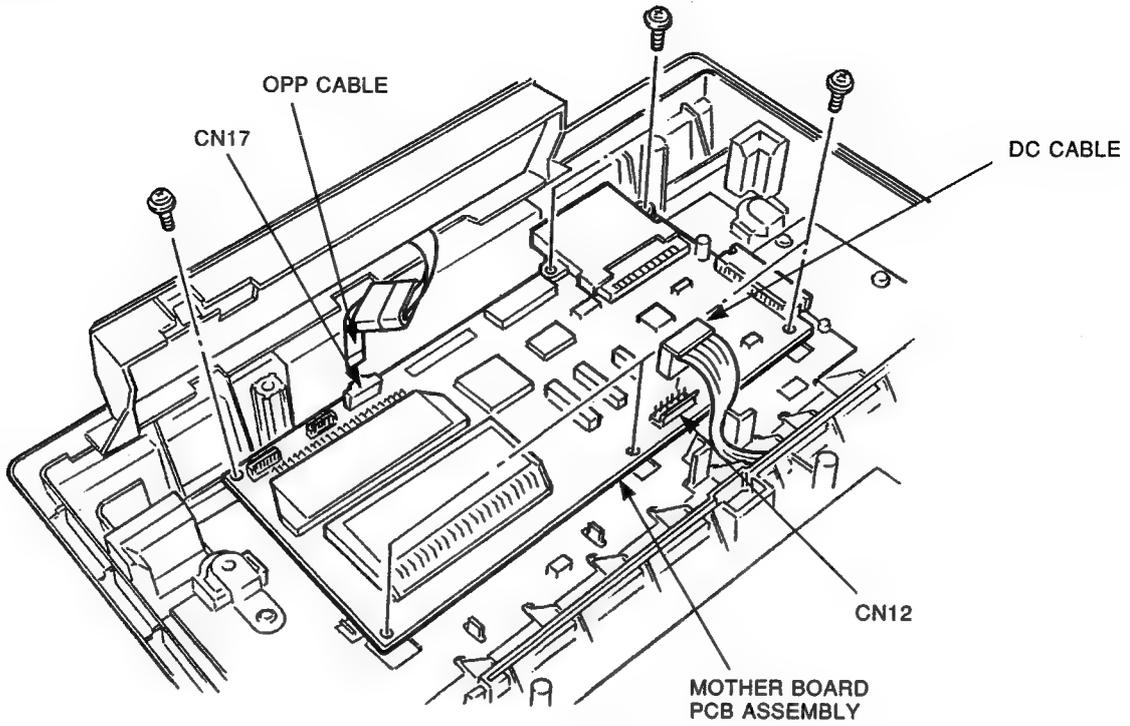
DC Cable Removal and Mother Board PCB Assembly Removal
